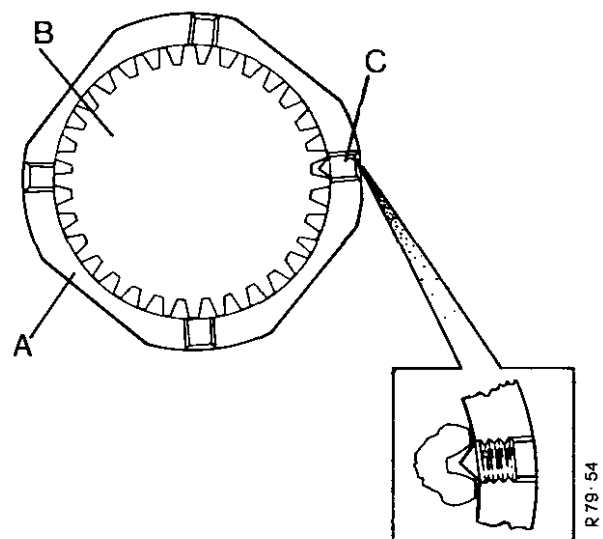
LOCKING NUT AND LOCKING SCREW
